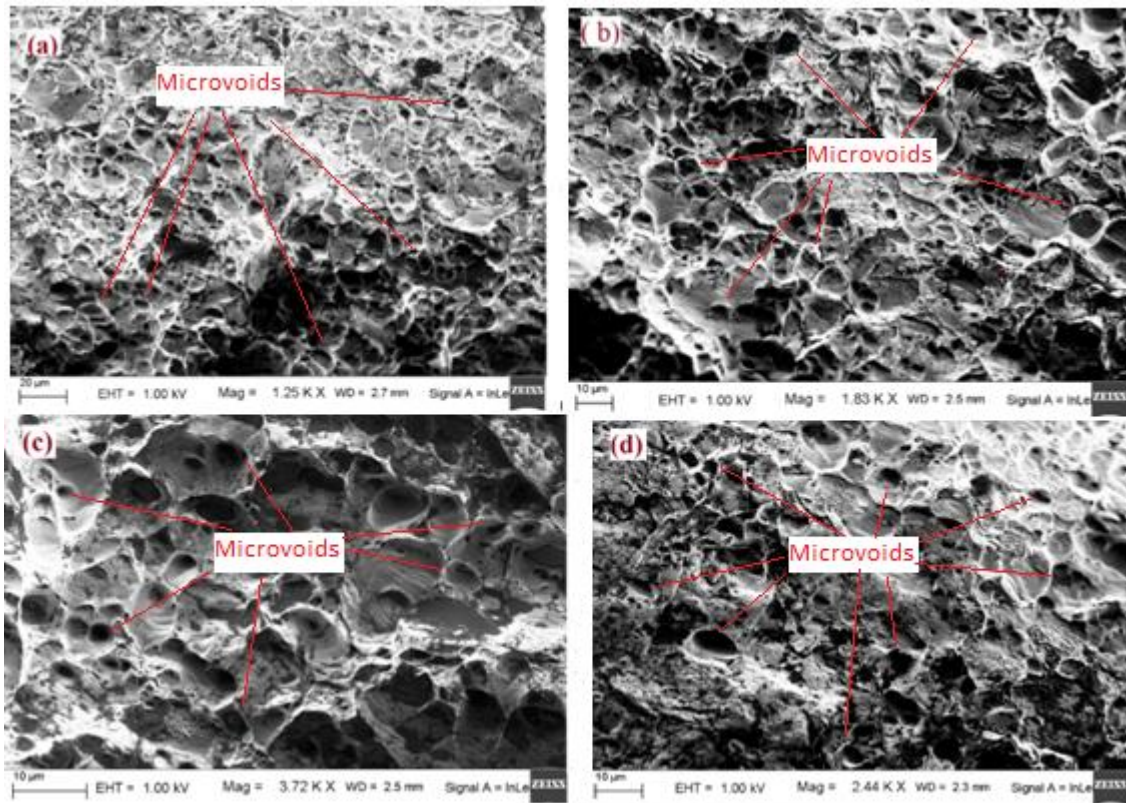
FSEM images of the fracture surface of weld region of (a) AA 5052 welded at 68 mm/min (b) AA 5052 welded at 93 mm/min (c) AA 6061 welded at 36 mm/min and (d) AA 6061 welded at 68 mm/min.
